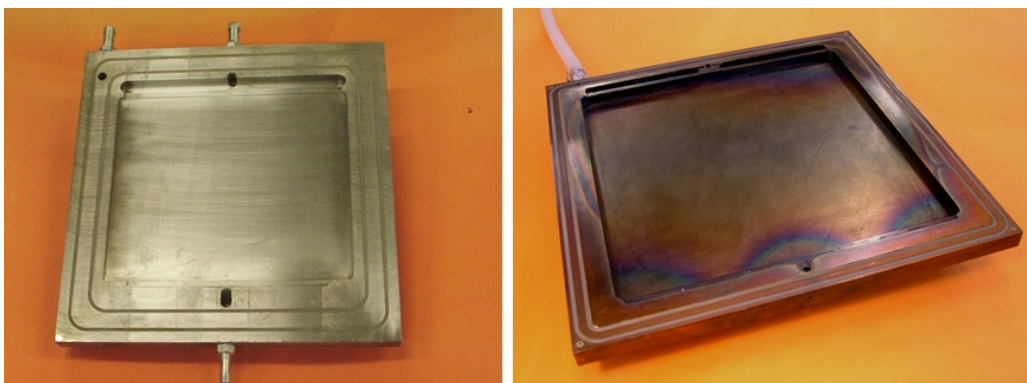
Infusion moulds for neat APA-6 panels. Left: original design, right: improved design for easier demolding.
